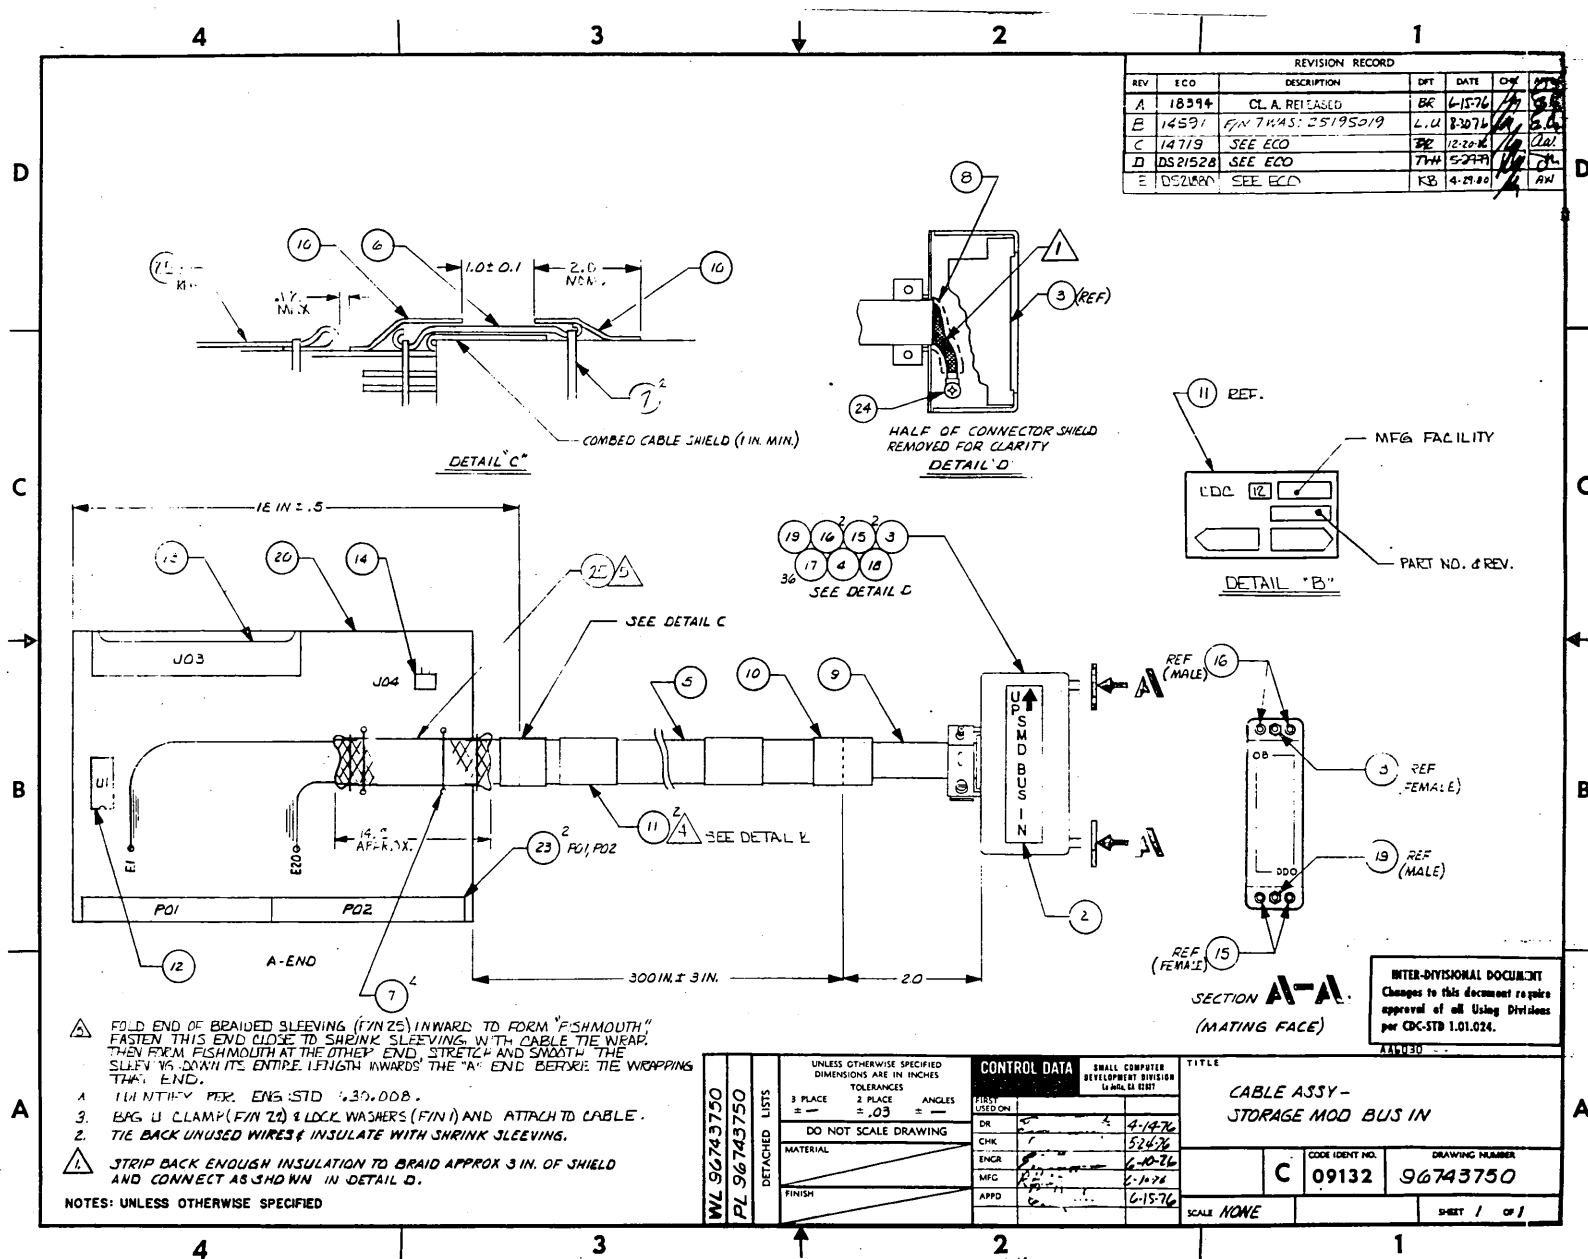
Cable Assembly - Module Drive Bus In (Sheet 1 of 4)
